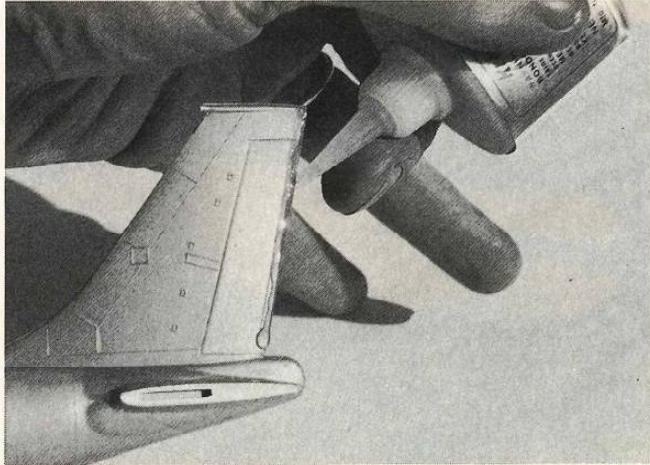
A bead of gap-filling super glue was used to build up the incompletely molded trailing edge of the rudder.
